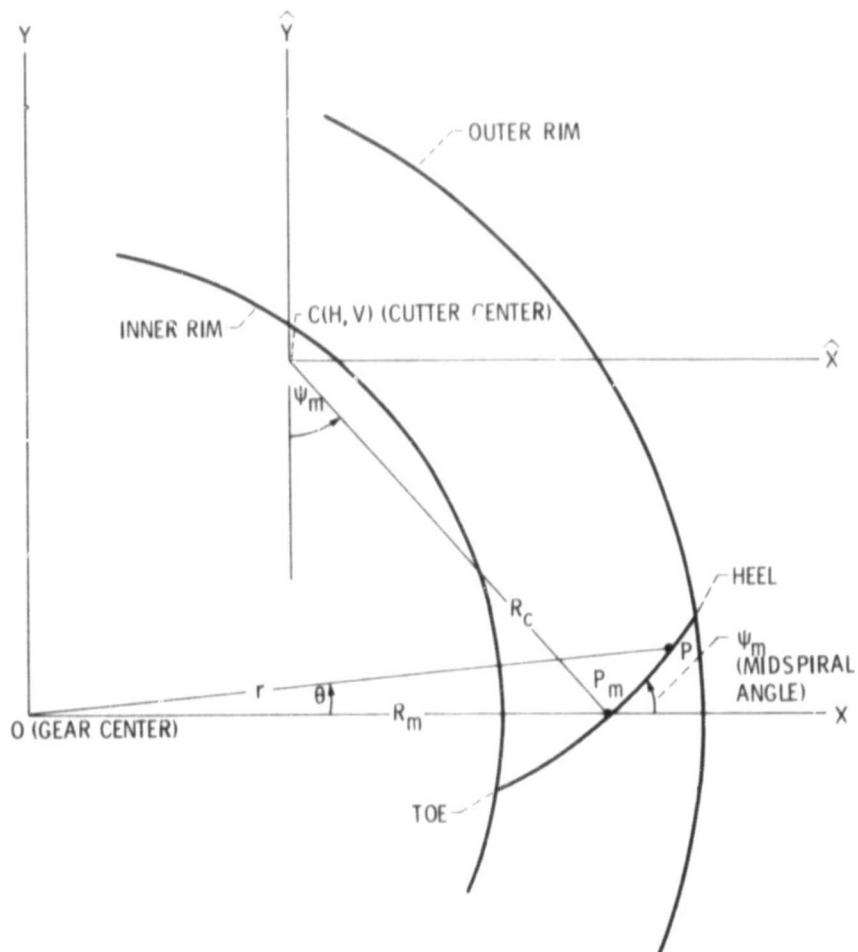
Top view of circular-cut crown gear with centerline of typical tooth.
